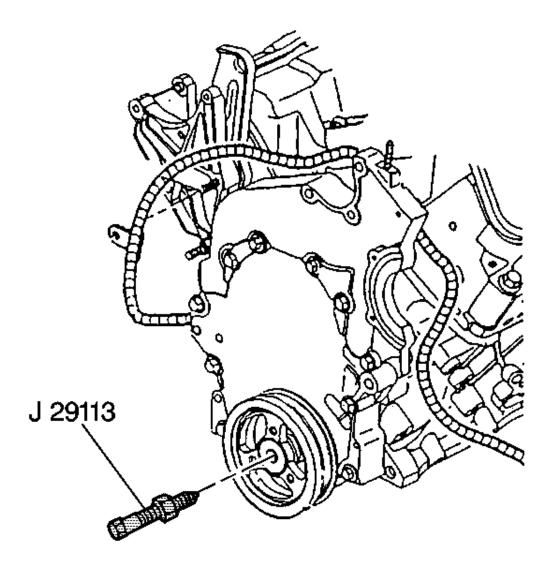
Using J 29113 To Install Crankshaft Balancer Courtesy of GENERAL MOTORS CORP.
